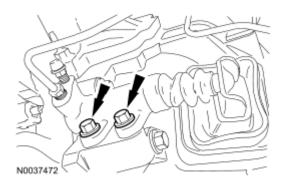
Locating Clutch Slave Cylinder Bolts Courtesy of FORD MOTOR CO.
